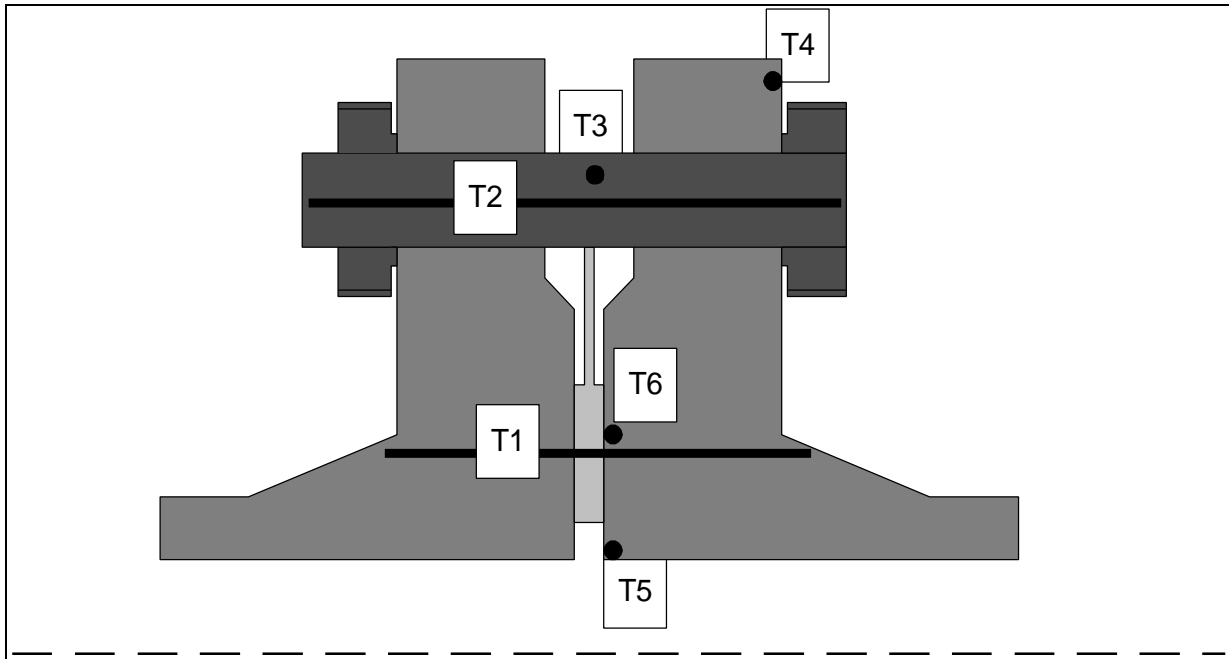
Nodal configuration of two welded neck flange
